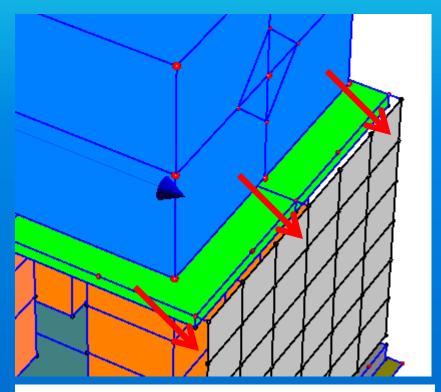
Final SDM Model ¾" Carbon Steel Plate Bolted to Motor Base Plate & Support Plate. View Showing FE Springs.
